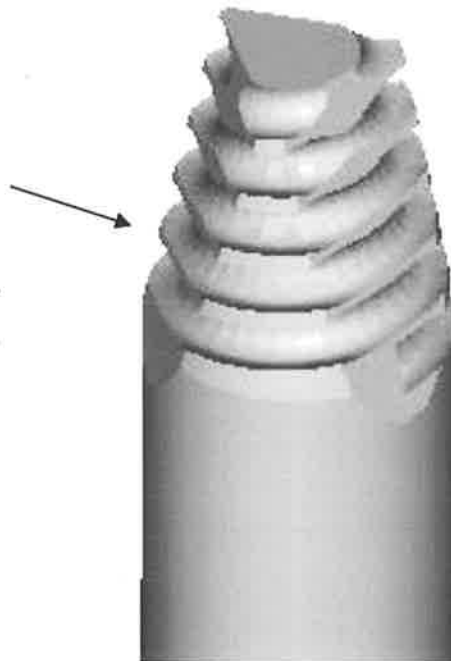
FSW pin CT2 (conical threaded) with 3 flats.
